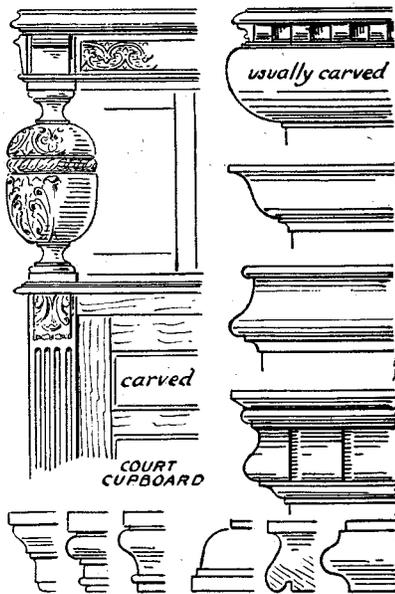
EARLY TUDOR AND ELIZABETHAN MOULDINGS, 1500-1600.
